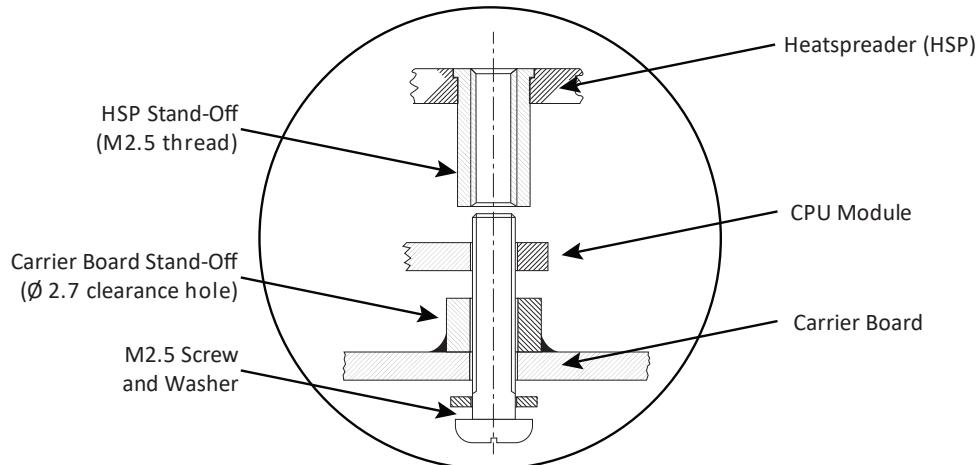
Heat Spreader Assembly Mounting to Carrier – Top Side Screw Access
